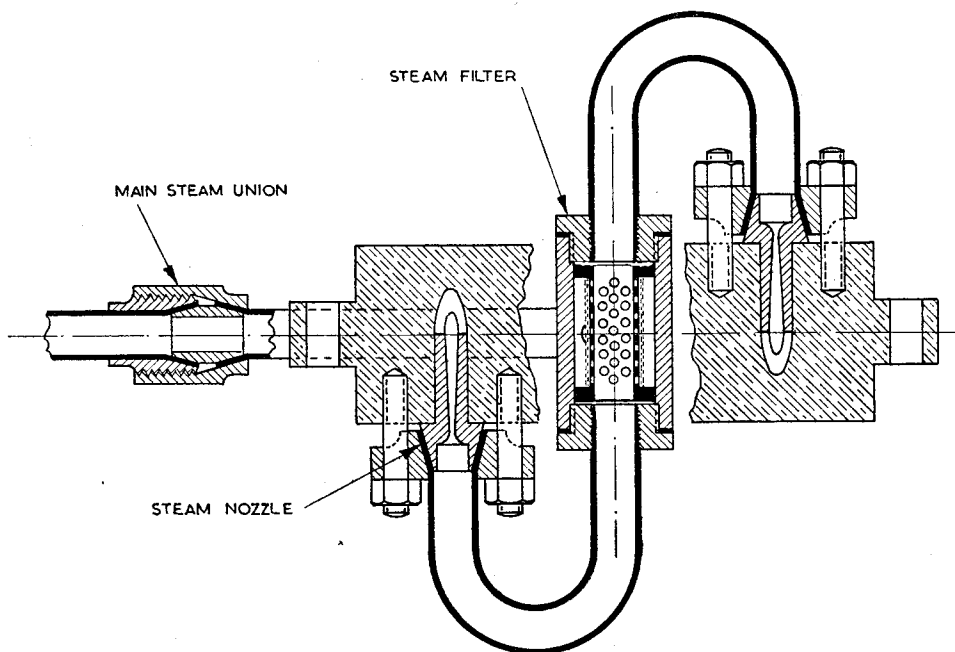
The nozzle and steam filter assembly for a flash steam turbine
